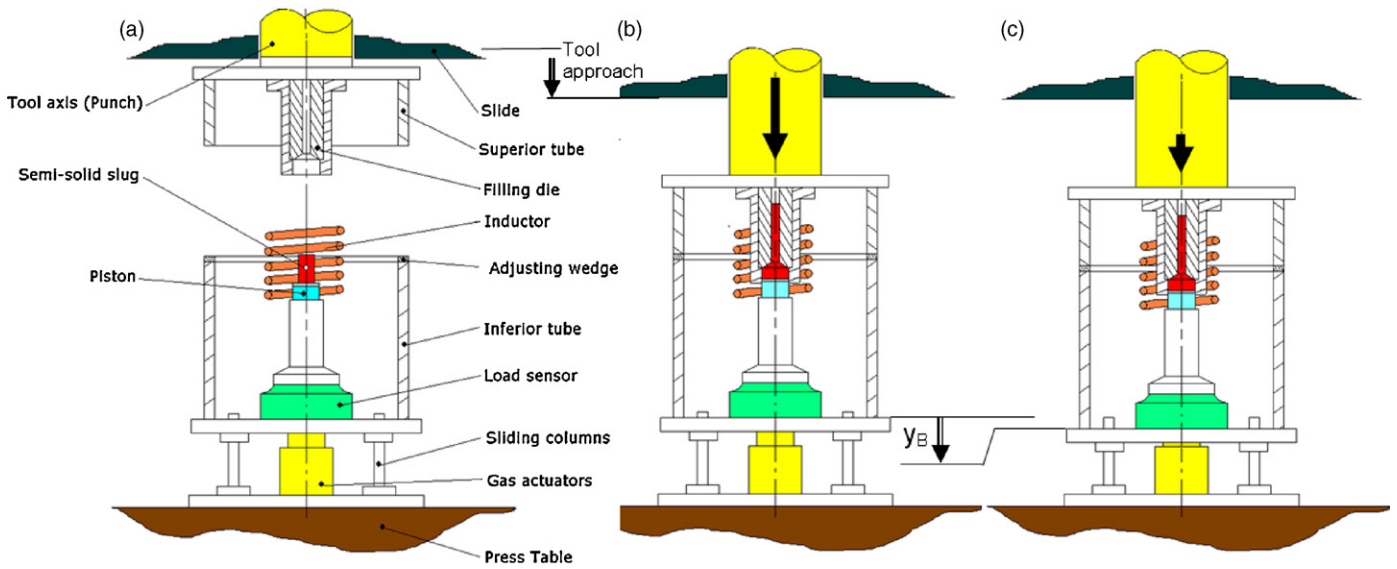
Complete extrusion device (Arts et Métiers Paristech design) settled on the “ULG” press, (a) heating step before thixoforming, (b) end of thixoforming (the tubes are in contact), and (c) tool deceleration step (dampers compression).
